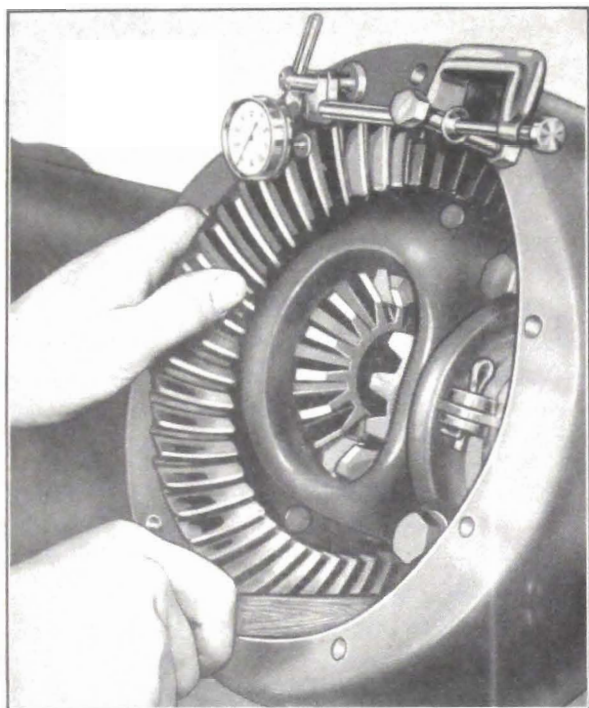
Indicating Ring Gear and Pinion Backlash
